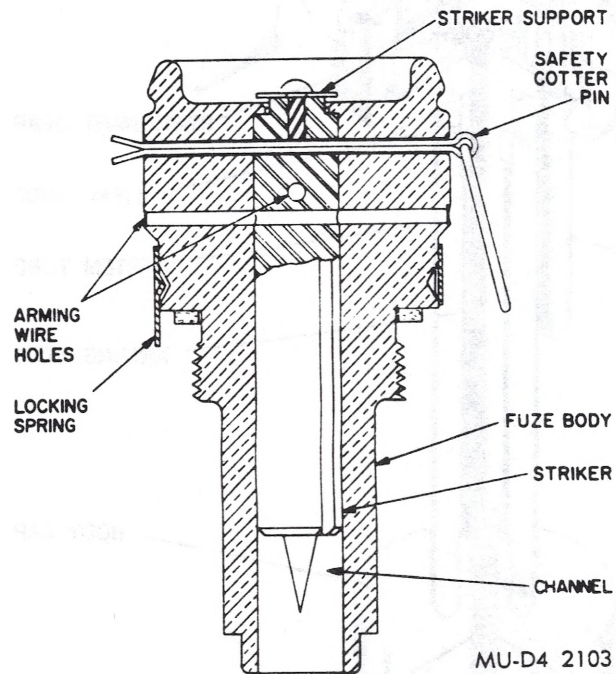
Cutaway View Showing Components of Fuze AN-M100A2 in the Unarmed Position
